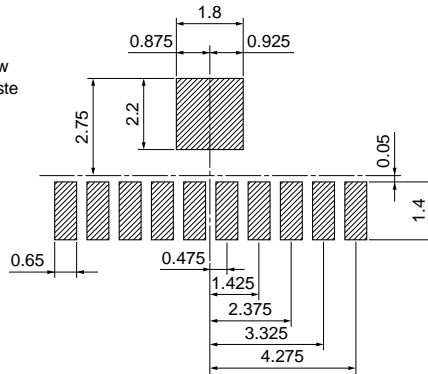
Recommended Size of Solder Creamed Paste (Reference)
